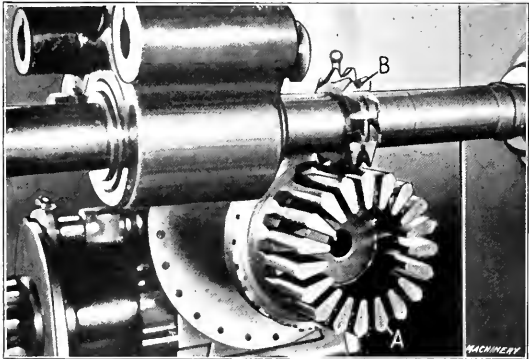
Finishing the Outer Diameter of the Punch Prongs, using a Formed Milling Cutter
